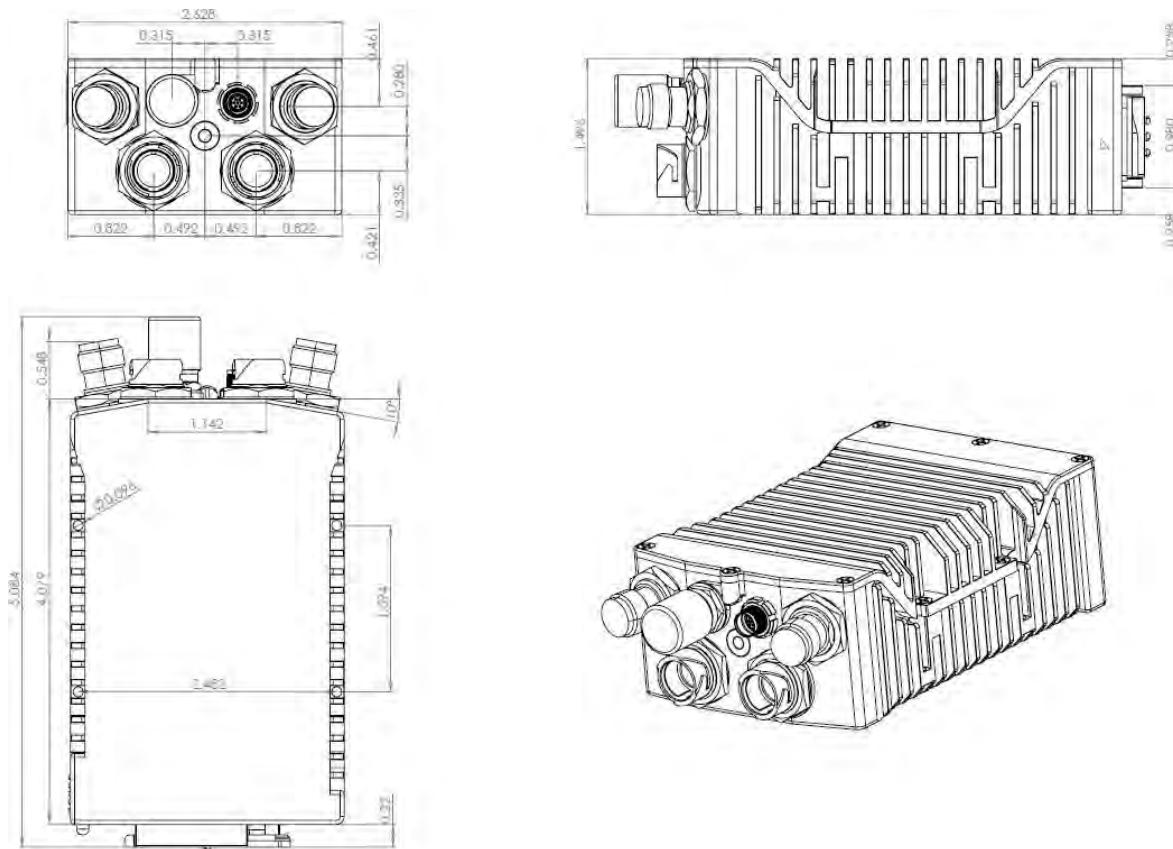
SC4200 Mechanical Drawing (top) and Mounting Pattern (bottom)
